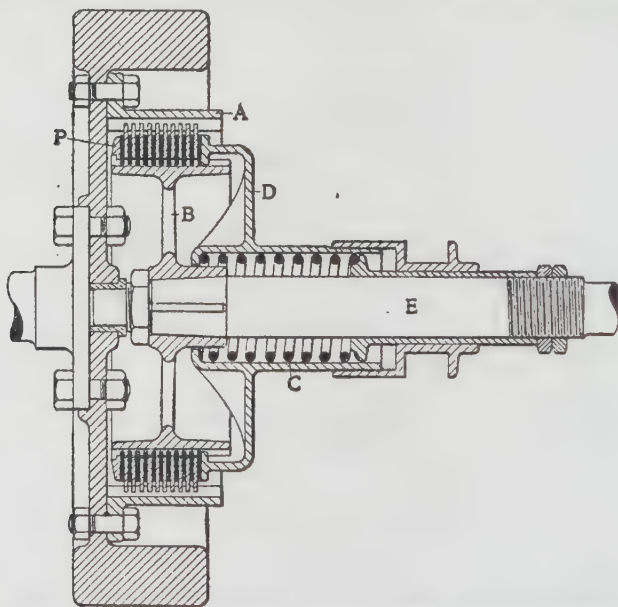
SPRING PRESSURE TRANSMITTED THROUGH SHAFT.
